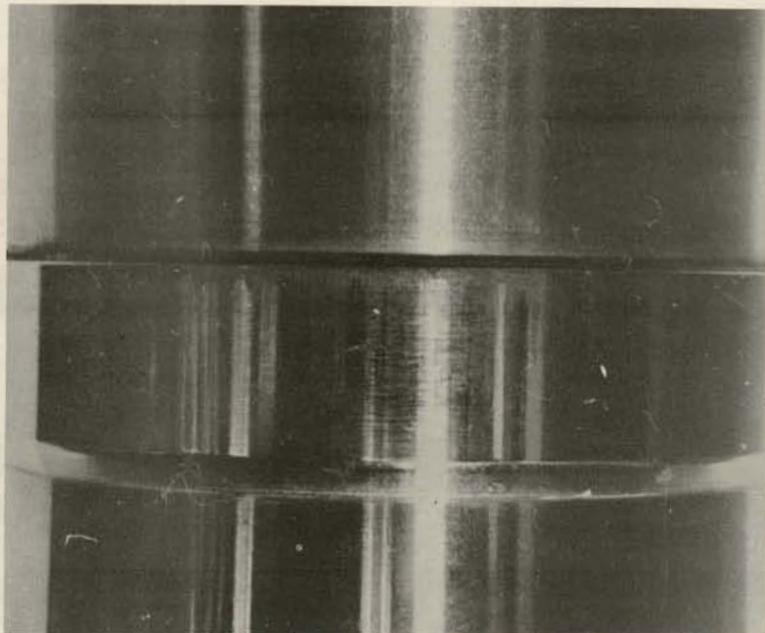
Test 4 - Chrome-plated 304 stainless steel nozzle (top) and 304 stainless steel sleeve (bottom) after galling test with 290-lb horizontal load. (NP Photo 18A-0-26, -28, -29)
